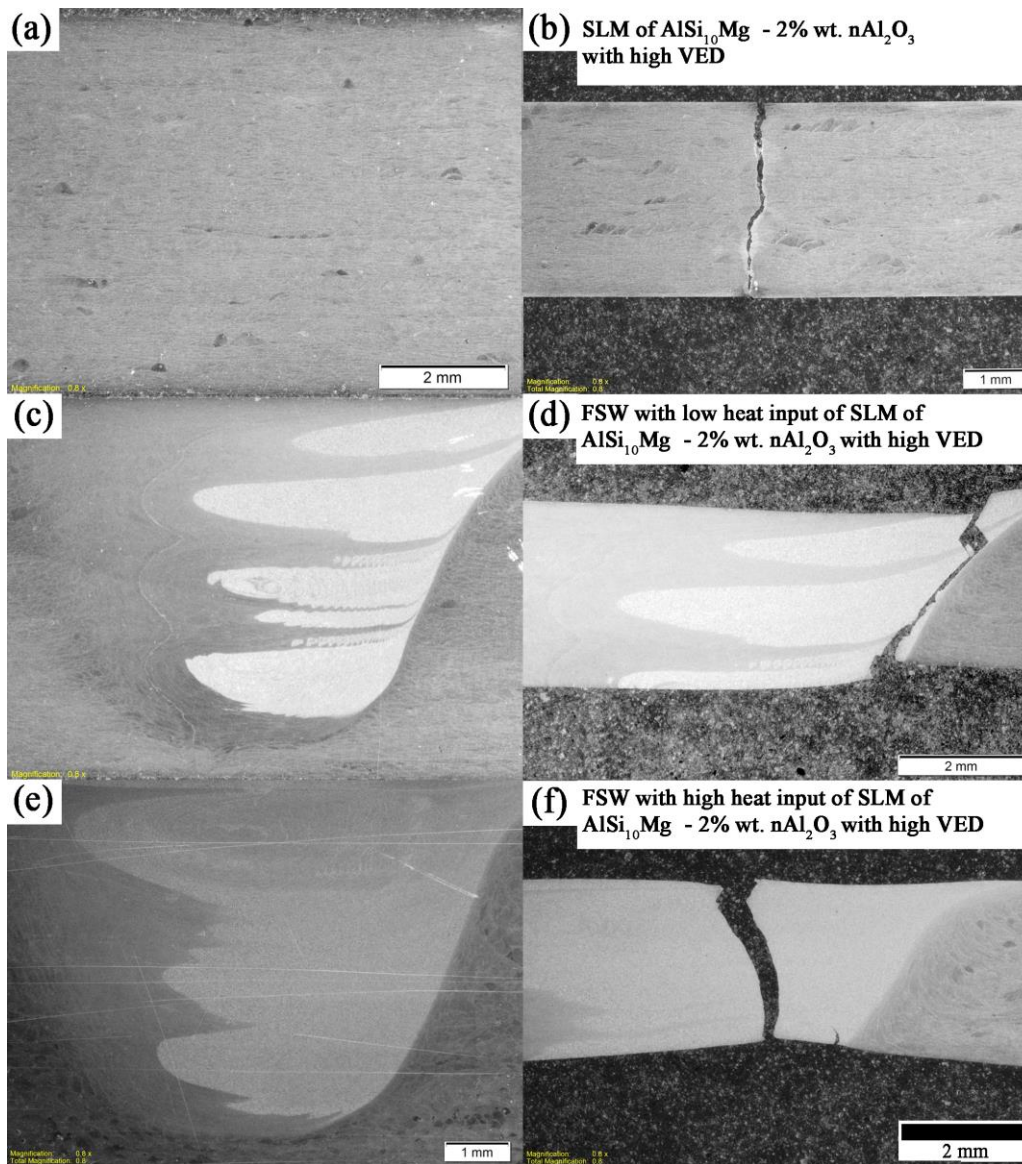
Cross-sectional view of the samples before (left) and after the tensile test (right).
